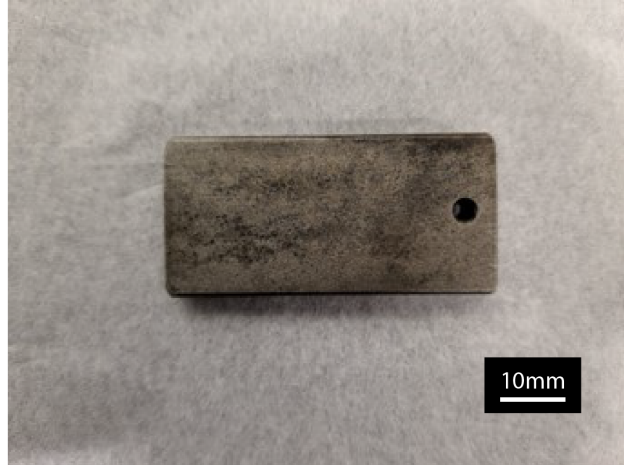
Photograph of a steel sample having dimensions of $2'' \times 1'' \times \frac{1}{4}''$ with an approximately 4 mm diameter hole drilled near the right side of the sample allowing it to be fixed to the tribometer stage.
